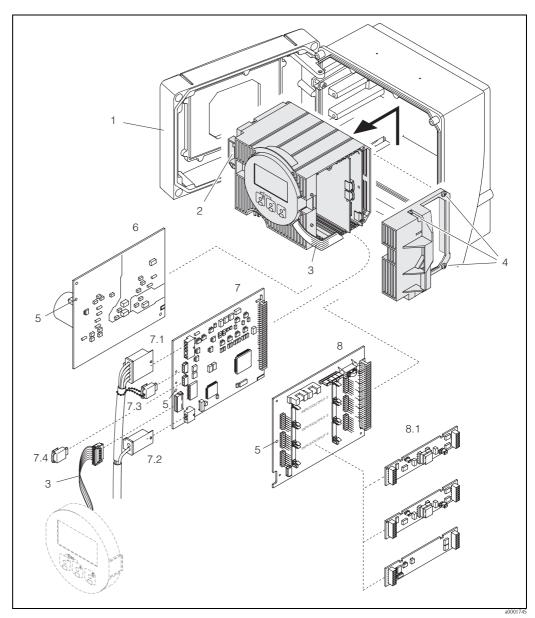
Wall-mount housing: removing and installing printed circuit boards
